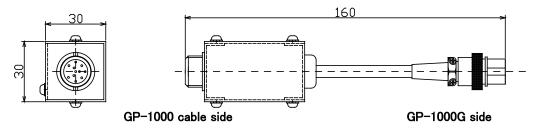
Conversion connector from GP-1000 to GP-1000G
